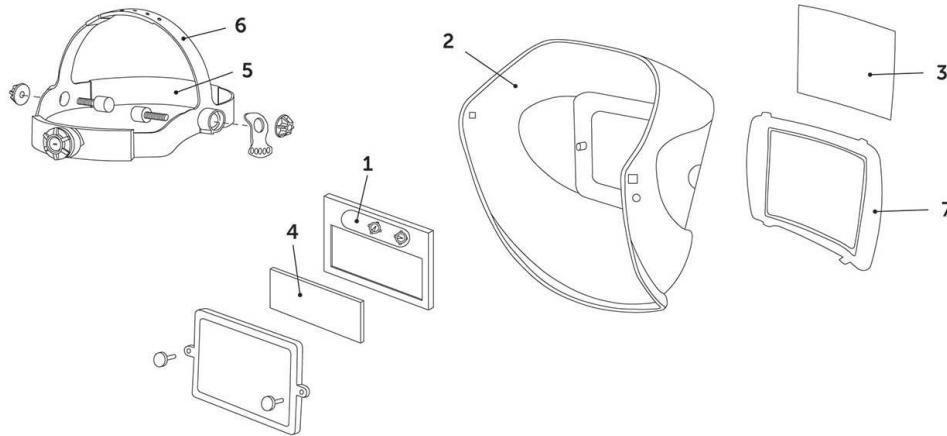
Element of the welding filter. Source: www.jackson-safety.com/wh40-30-element.html
